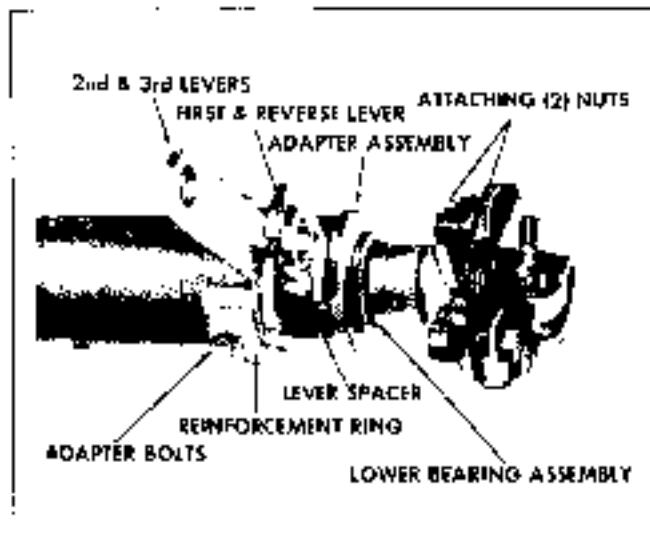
Lower Shift Levers and Adapter (Pontiac Show)
